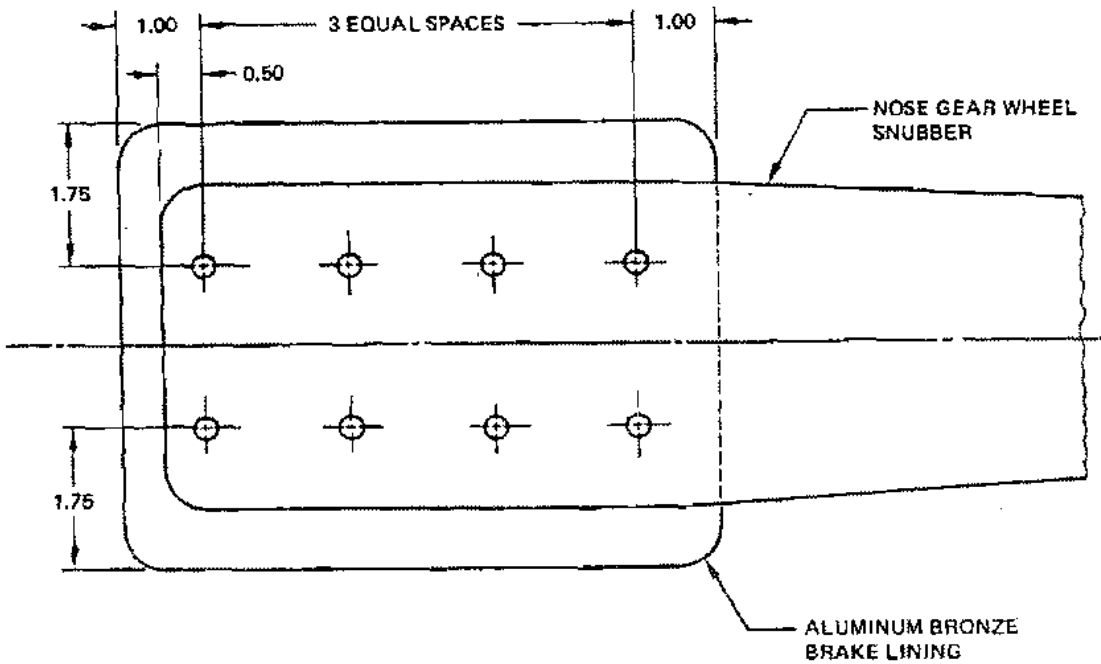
Details on bore holes, rear view (dimensions in inches)
